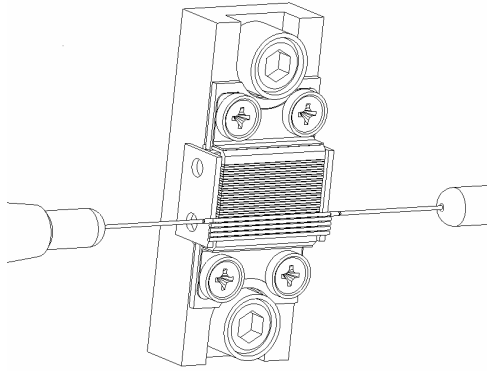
Drawing of the alignment fixture, lens being aligned and partially lensed laser-diode array
